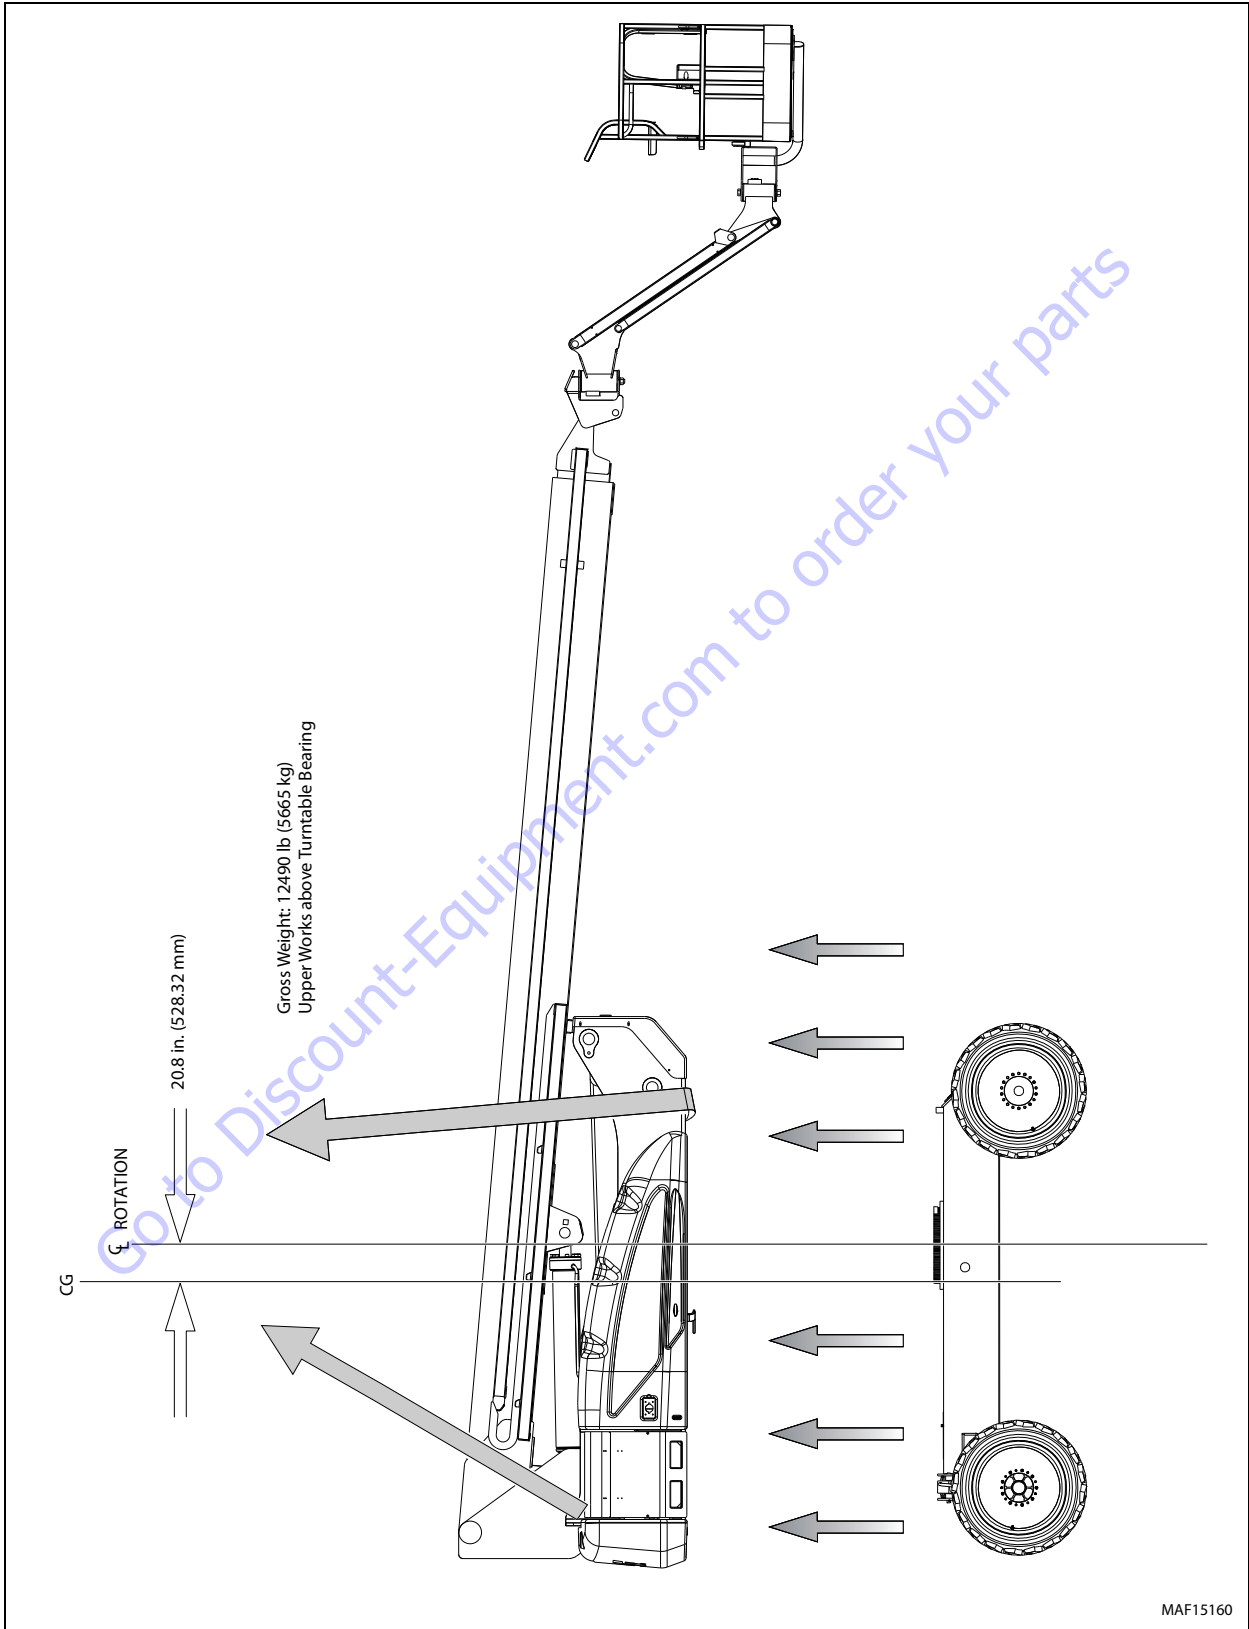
Swing Bearing Removal - EC600SJP & H600SJP
